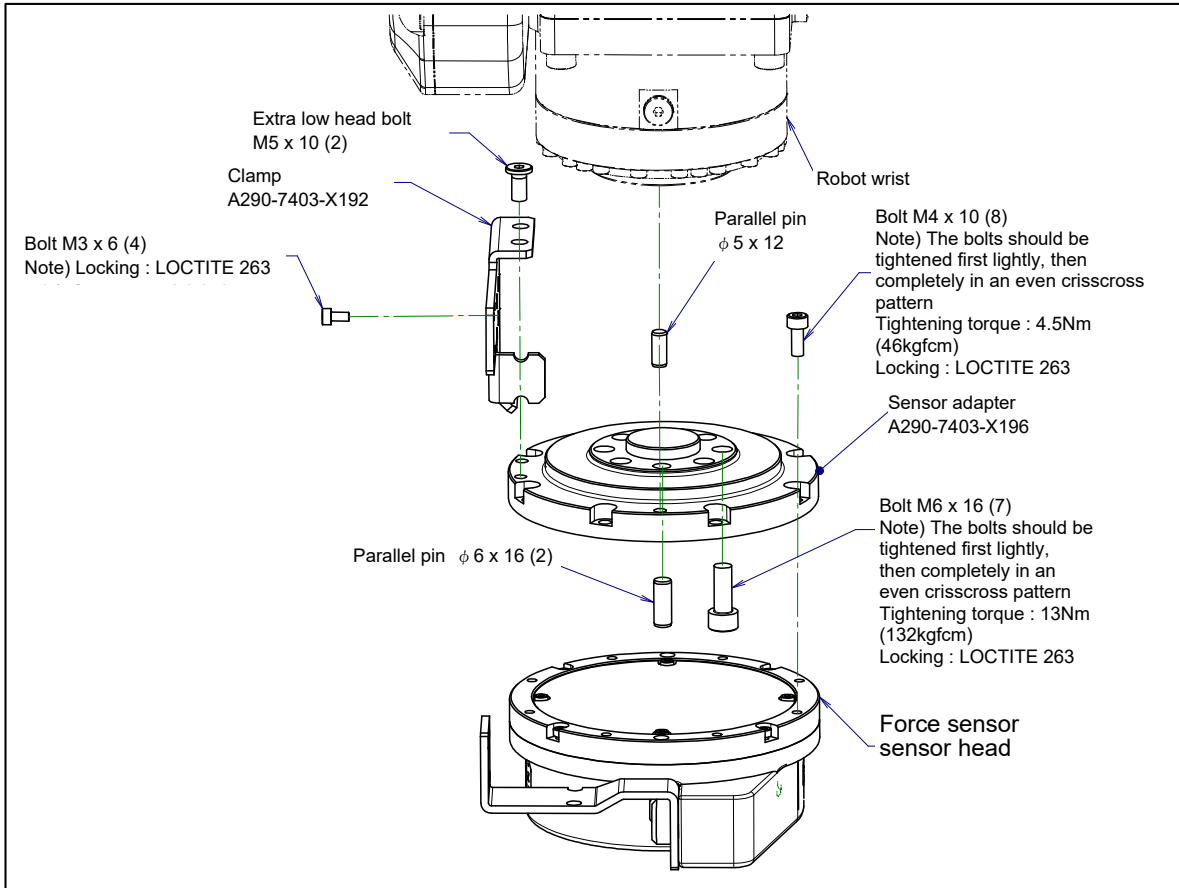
(d) Replacing the force sensor, sensor head and adapter (M-20iA/20M/35M+FS-40iA)
